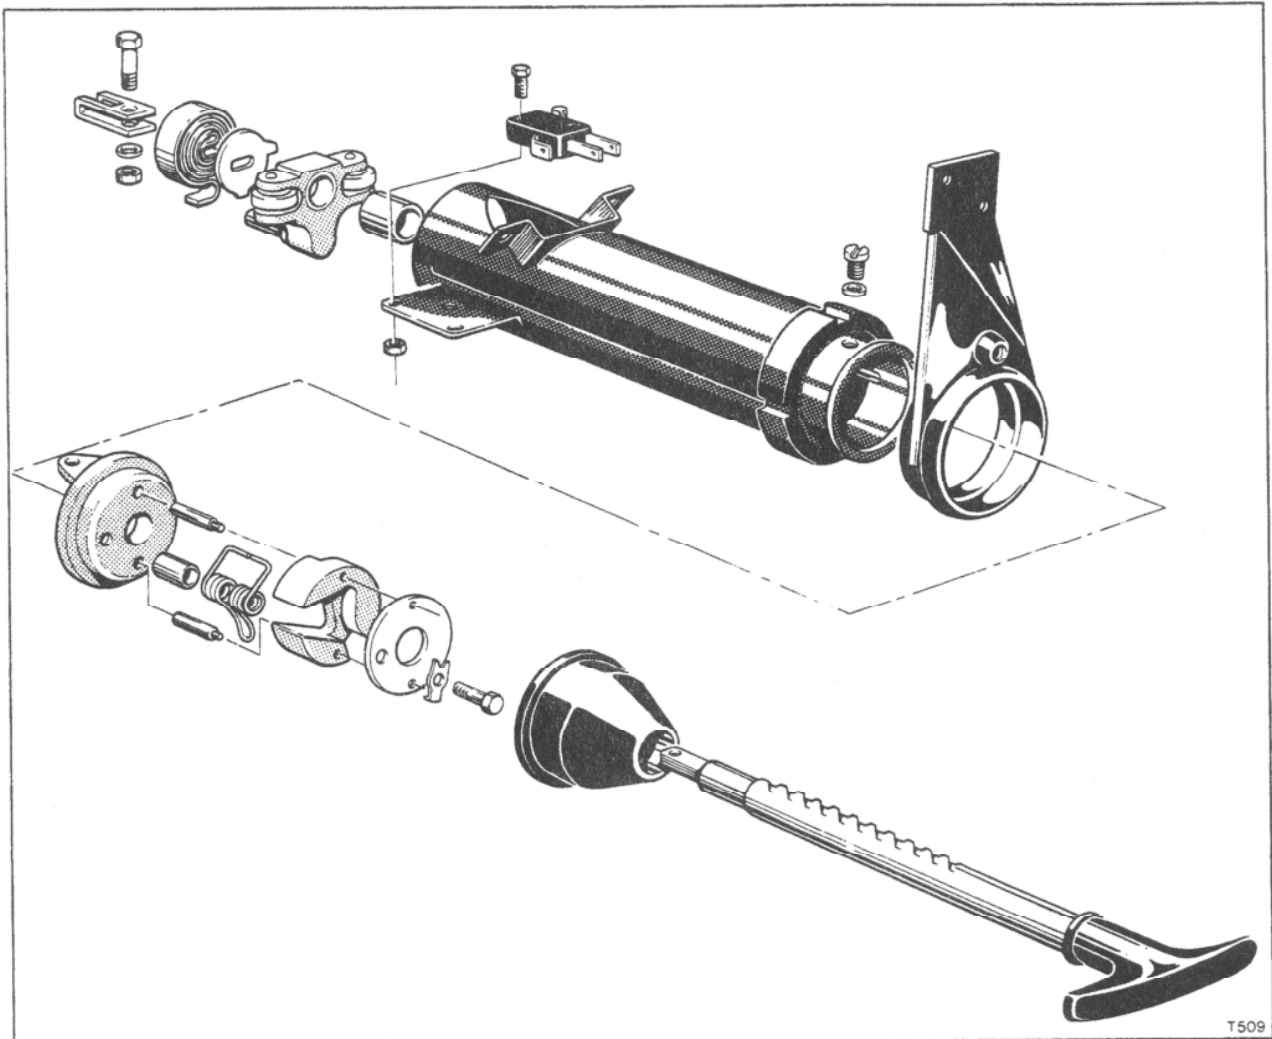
Parking brake ratchet assembly (Right-hand drive cars)
